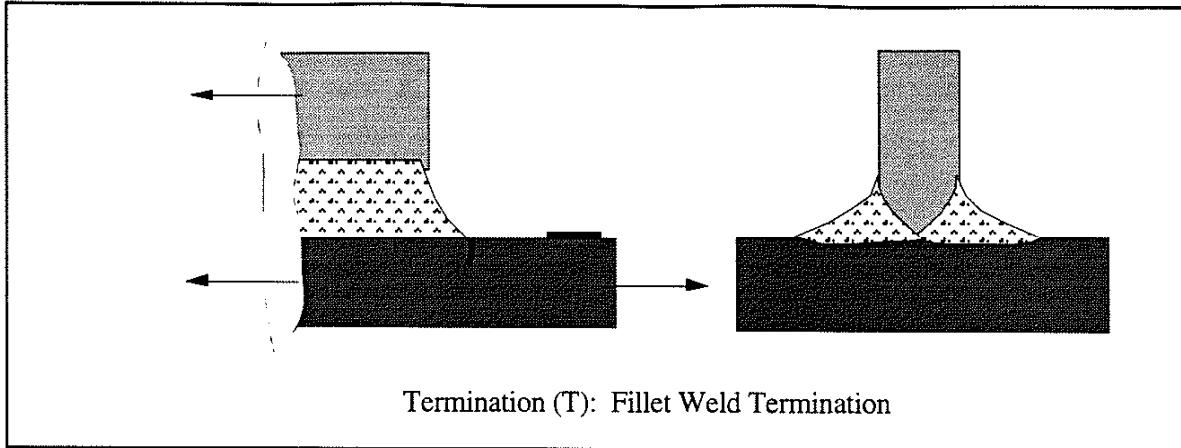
The "Bad" weld. Initiation site at the end of a fillet weld.
